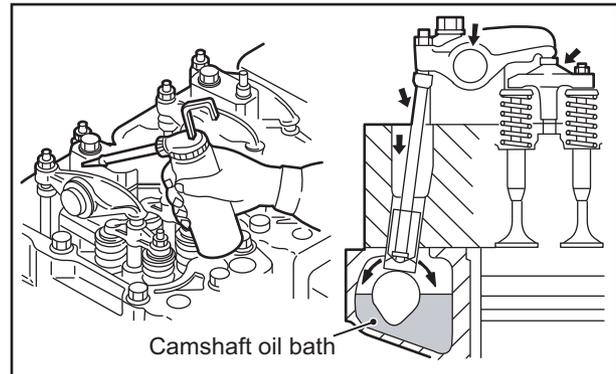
Pouring engine oil on valve mechanisms and chamber
